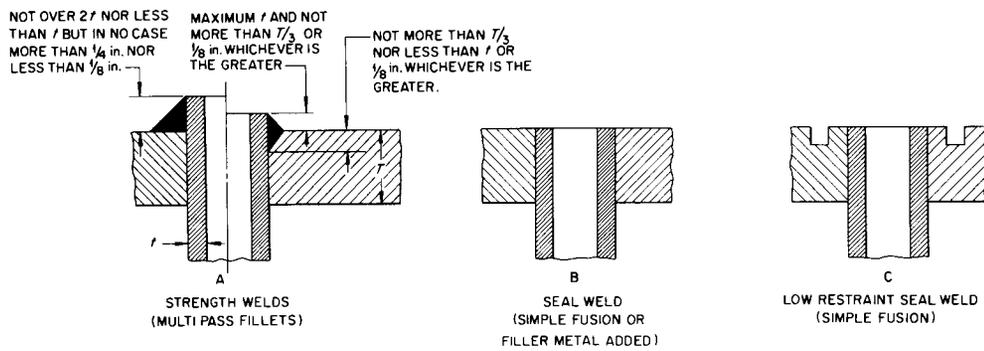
Basic Joint Designs for Tube-to-Tube Sheet Welding.
